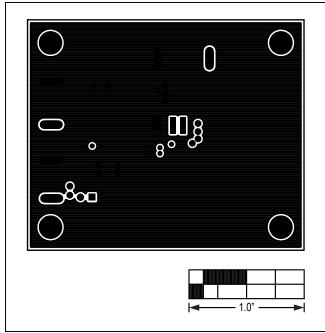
MAX17515 EV Kit PCB Layout—PGND Layer 3
